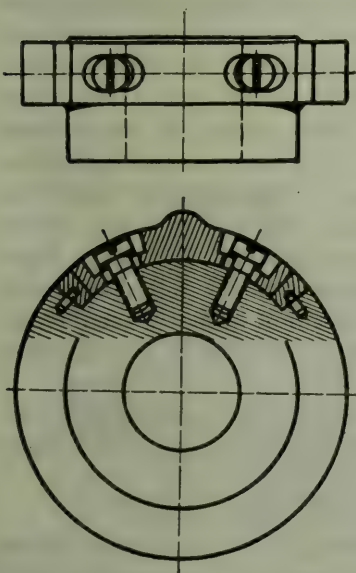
View of cam for actuating fuel valve, showing slotted holes.
